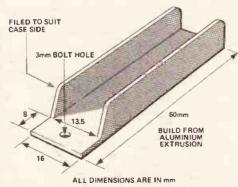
Details for the aluminium extrusion that houses the photoprobe.
